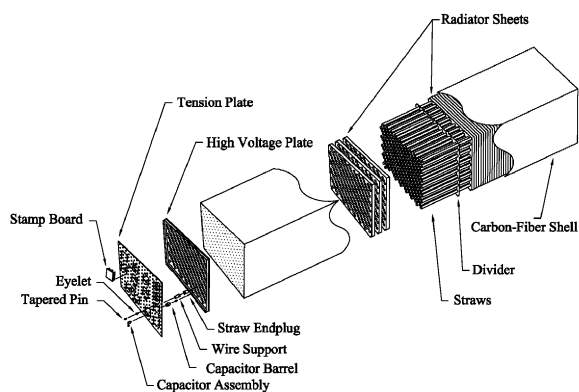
Exploded view of barrel module, showing the various mechanical components within the module itself and at one of its ends (see text).
